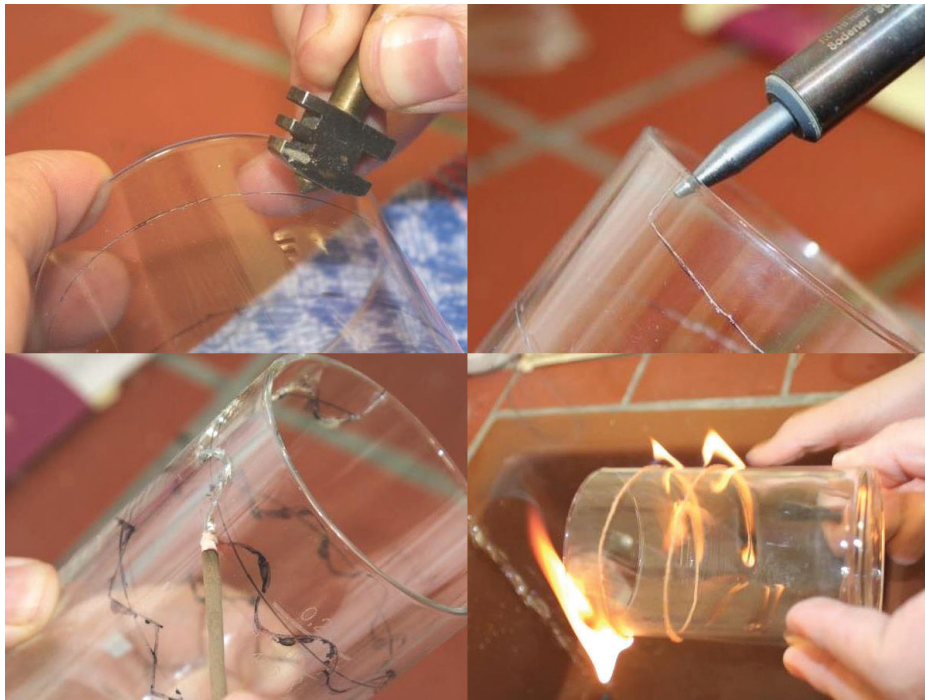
Notching the glass with a diamond point (above left), forming an initial crack with a soldering iron (above right), and crack propagation with an incense stick (below left) and with a turpentine-soaked thread (below right)
